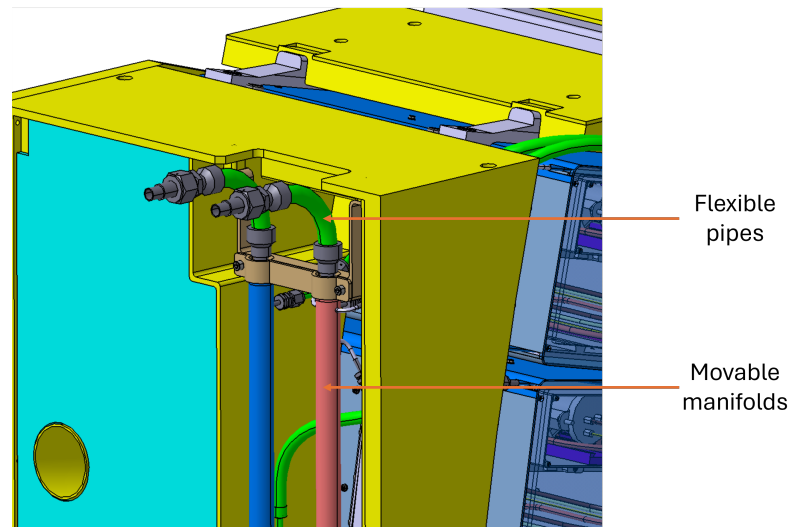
Details on the new manifolds layout on the top connection area ([80]).
